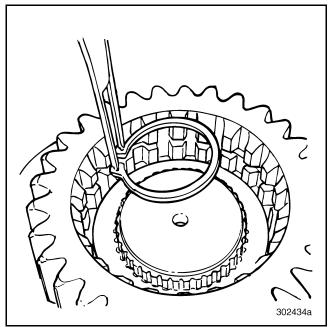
Removing Snap Ring from Front of Shaft (T313L21/T318L21 Shown)
